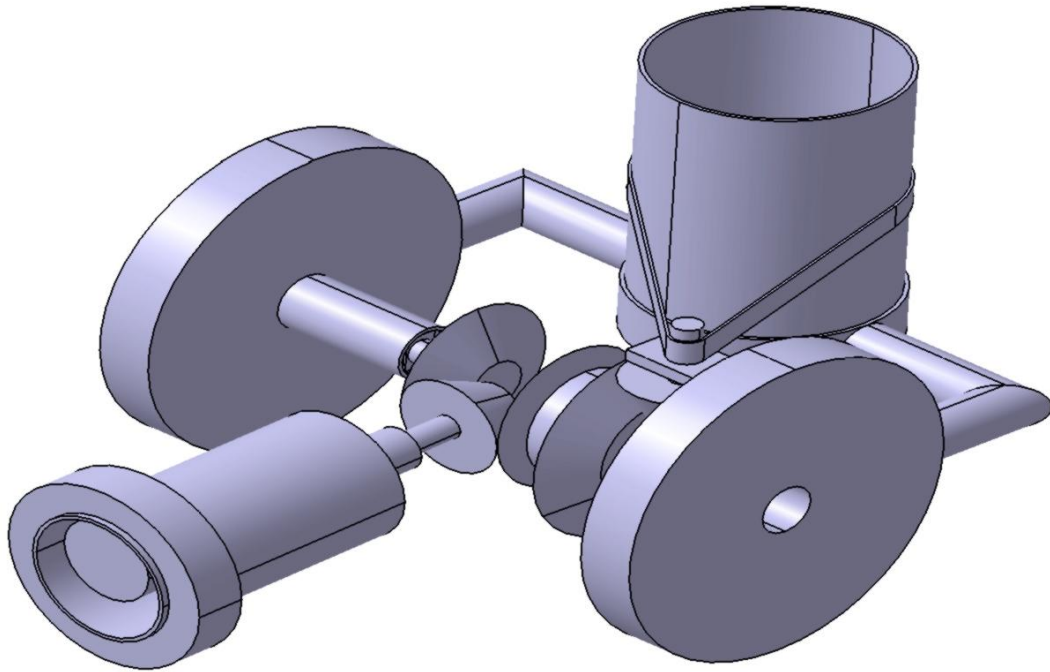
Assembled view of the Parts shown in fig 15 & 10
